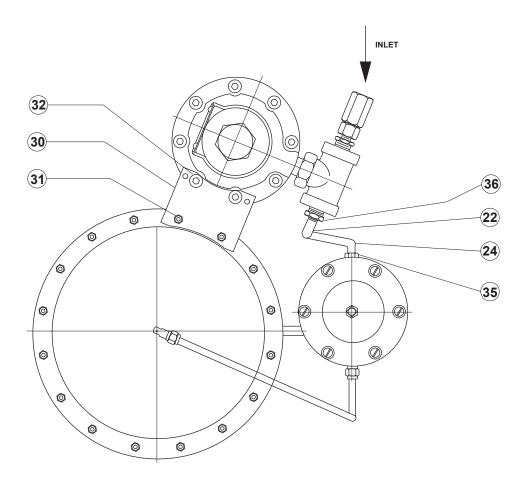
61 Series Pilot and Type 1806 Check Valve Mounting
